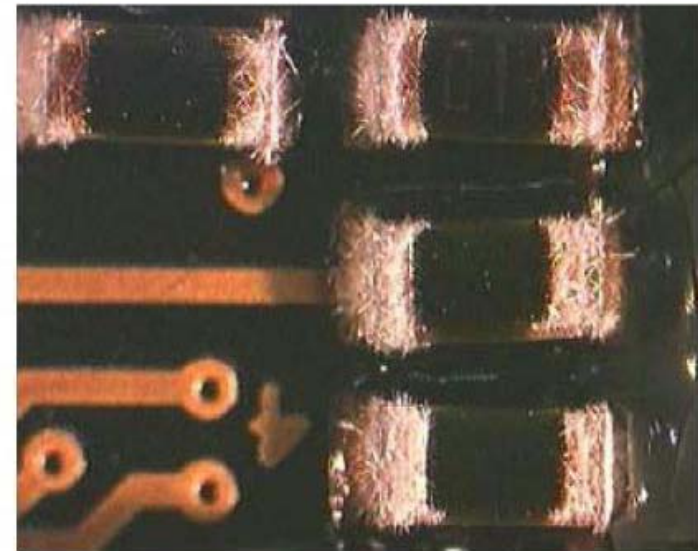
Close-up showing tin whiskers on the solder joints. 40x
